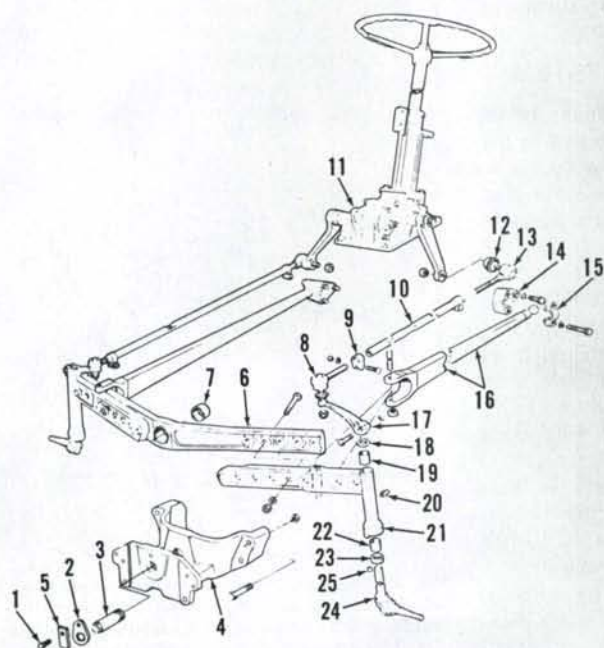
Exploded view of front axle and related parts used on Models 2310, 2600, 2610, 3600, 3610, 4100 and 4110 without a cab.
